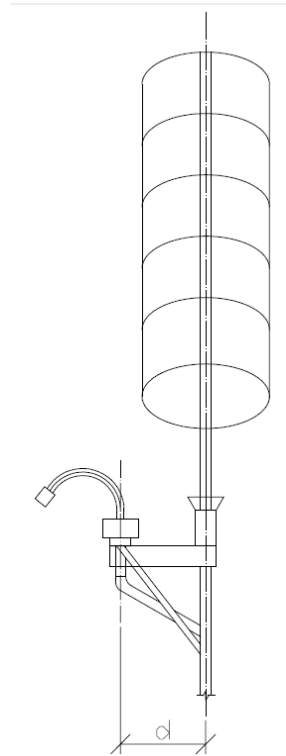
Vertical access to the connection point of the flexible jumper and monitoring umbilical
